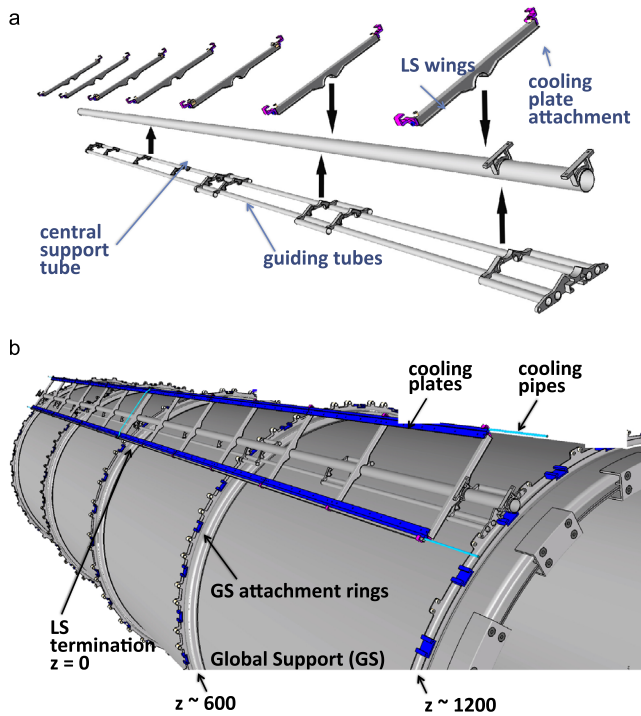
(Upper) Exploded view of the LS CFRP components, including the 7 module and service attachment wings, the central support tube, and the LS attachments to the global structure. (Lower) View of 2 assembled LS units on a barrel with attachment points at 3 points along the LS length (nominally at $z=0$ mm, $z\sim 600$ mm and $z\sim 1200$ mm). The attachment at $z=0$ mm is designed to capture the LS units inserted from each end of the GS. The CC2D cooling plates and titanium alloy cooling tubes are added for clarity, but the DSM modules and the service bus are not shown.
